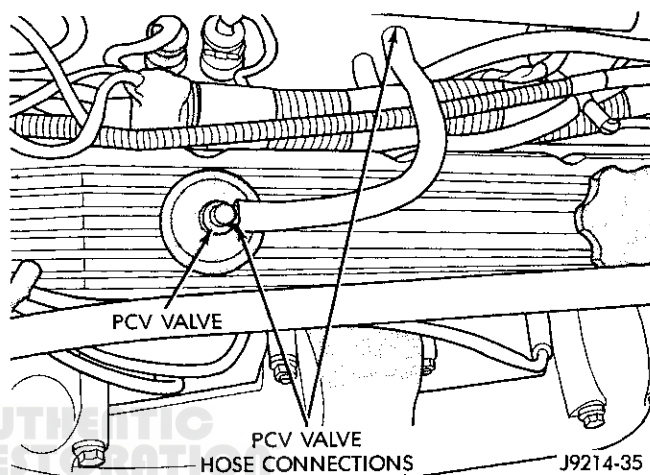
PCV Valve Hose Connections—3.9L/5.2L/5.9L Engines—Typical
